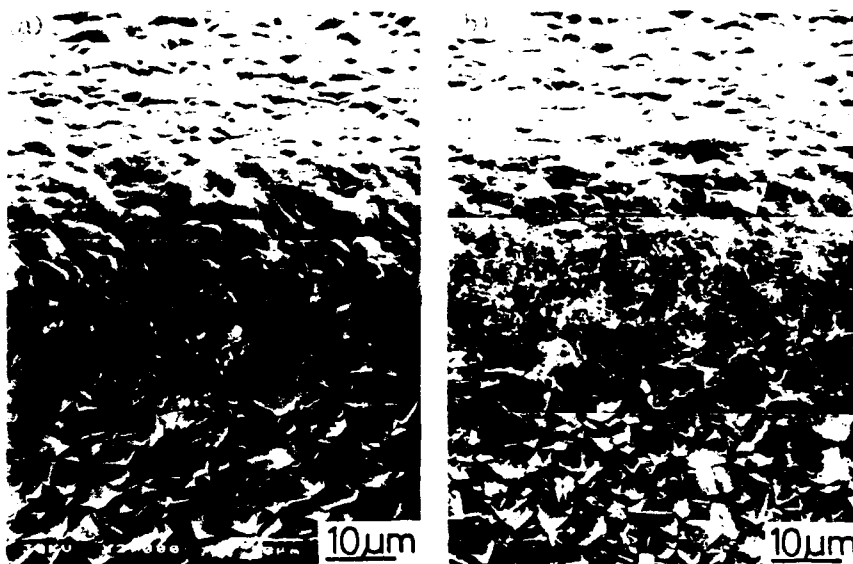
The damage to diamond film on the cutting edge after milling an Al-18%Si alloy. (a) 240 passes at 300 m/min. (b) 36 passes at 600 m/min.
